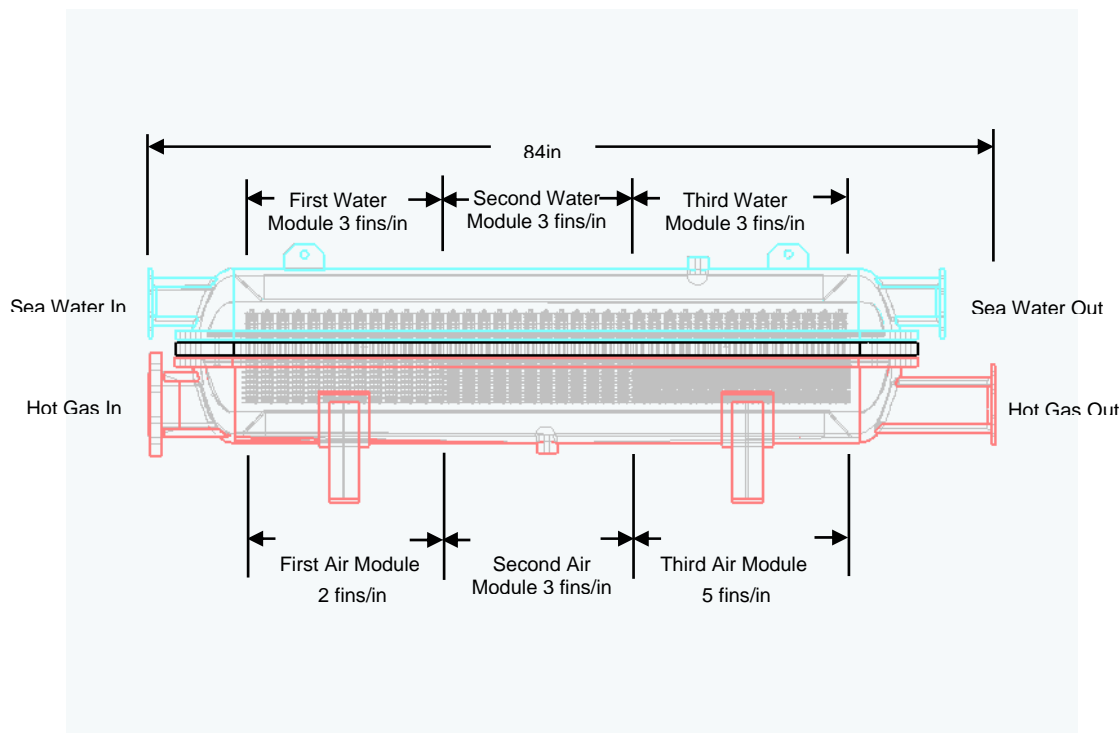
Side View illustrating the Three Heat Pipe Sections.
